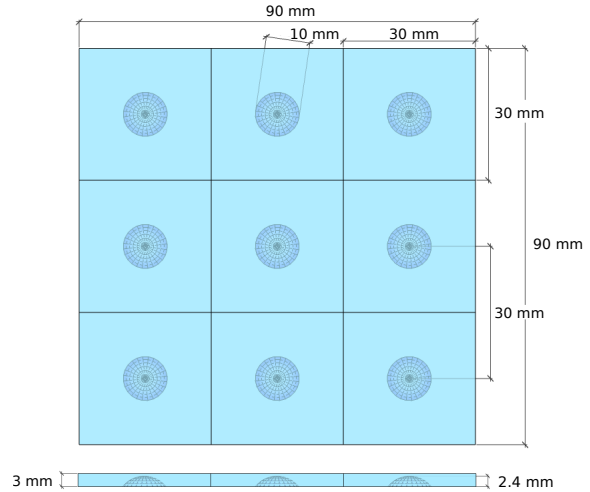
Technical drawing of the surface dimples in the megatile prototype.
